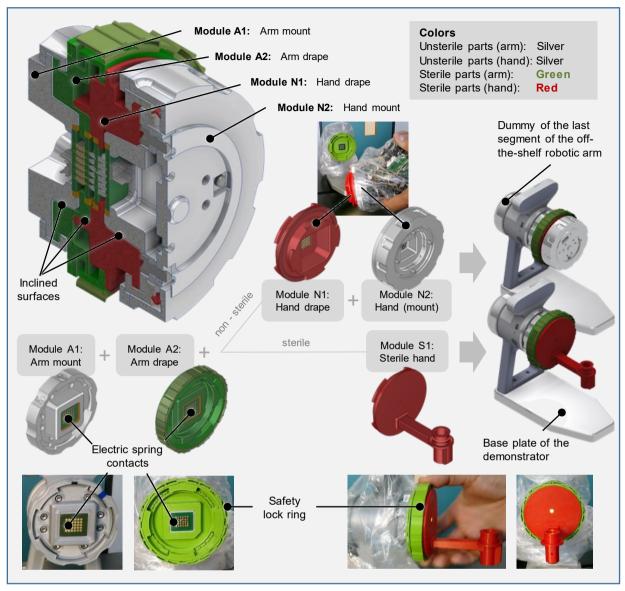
Concept overview of the universal mechatronic and sterile interface for the intraoperative (re)configuration of bone-shaping robots
